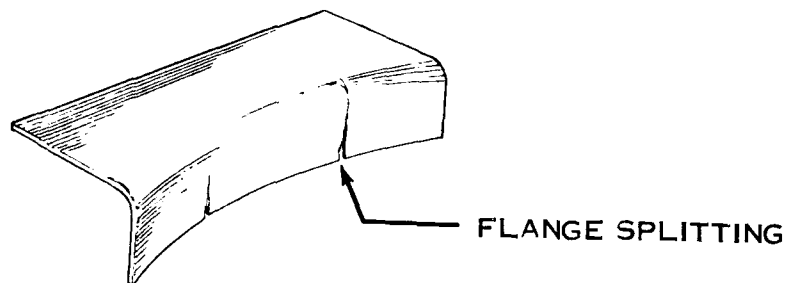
FLANGE SPLITTING OF RUBBER FORMED STRETCH FLANGE
